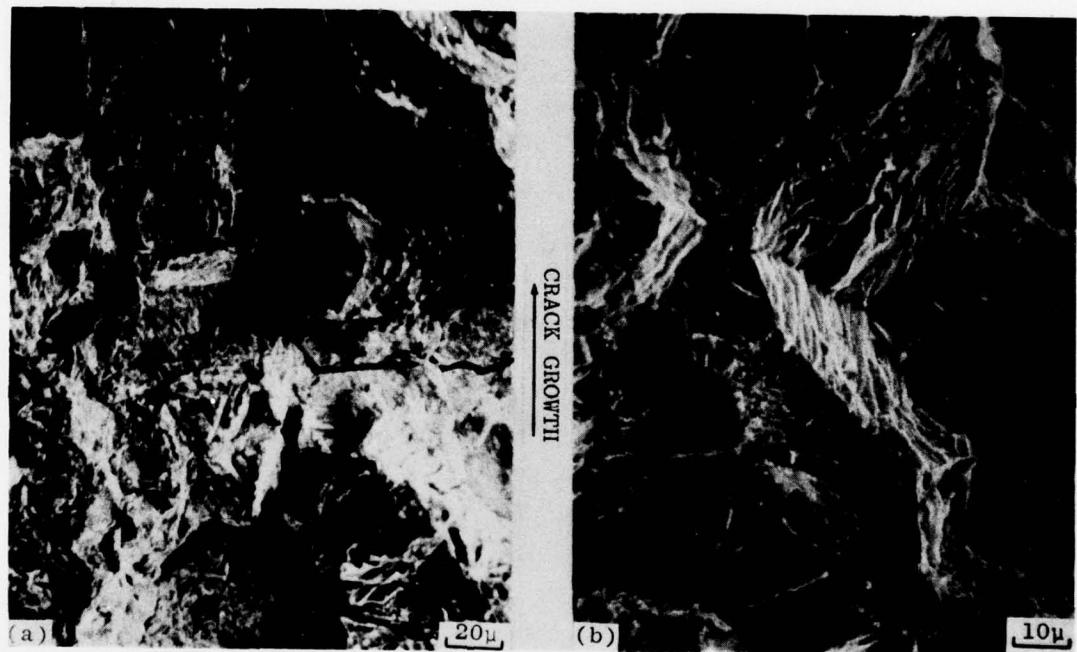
Fracture surfaces for heat treatment C
